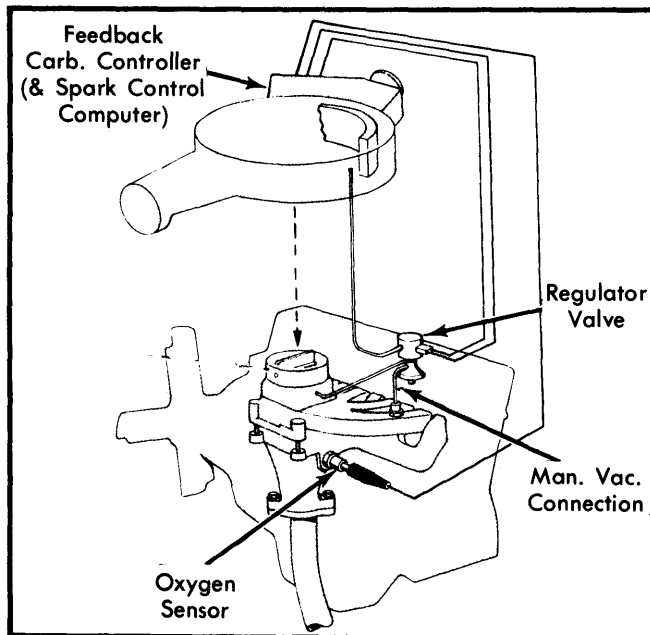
Major Components of Electronic Feedback Carburetor System (6 Cylinder Shown)
